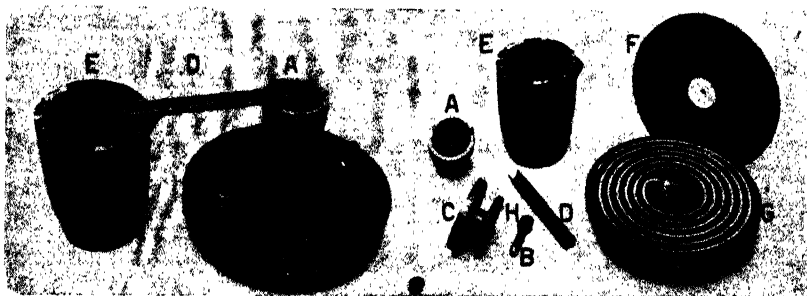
Spiral chill mould for fluidity test (Courtney).
